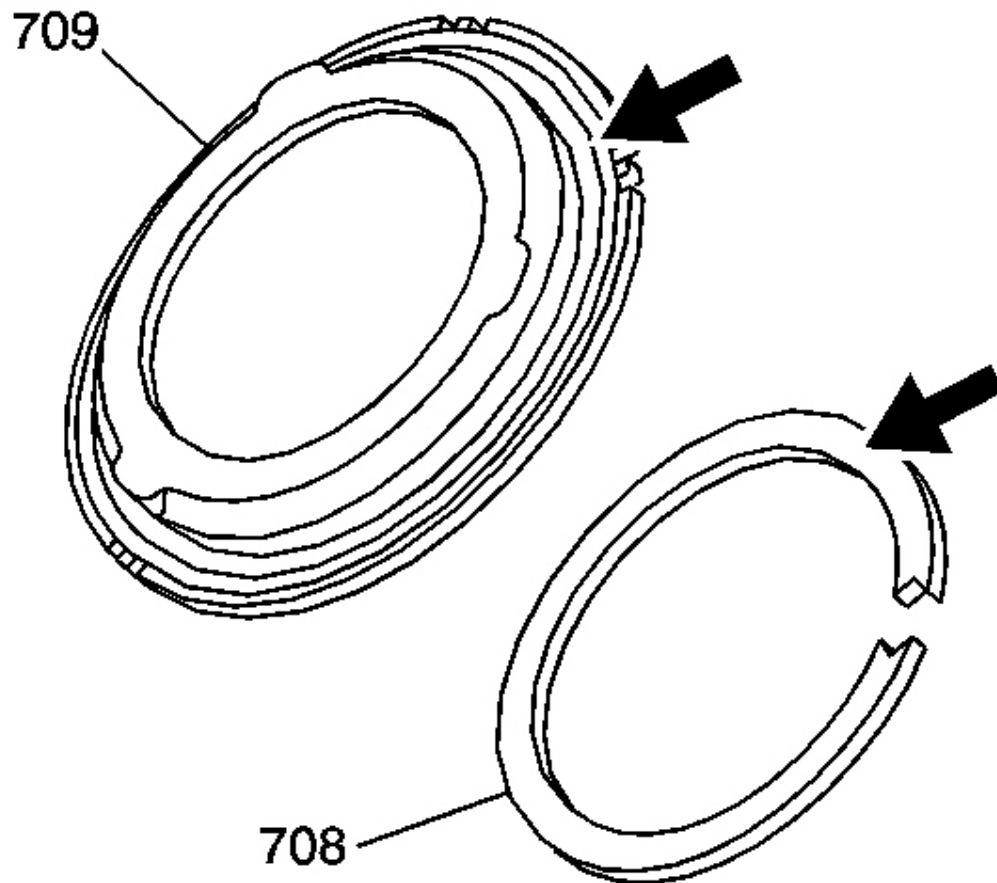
Inspecting Clutch Piston Spring Retainer Cap & Retaining Ring For Damage
